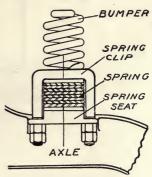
Peerless Front Spring Bumper and Integral Spring Seat.
